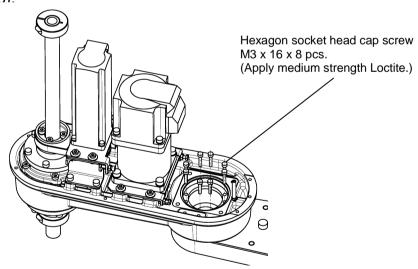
Mounting Arm 2 (KHL-300, KHL-400)
